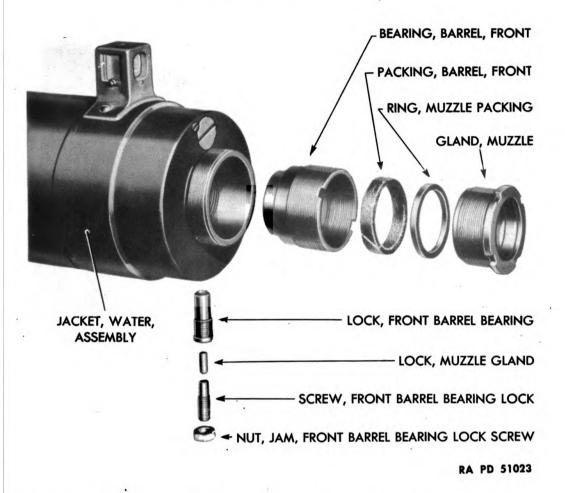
Front Barrel Bearing Group (Water-Cooled Gun)— Exploded View
